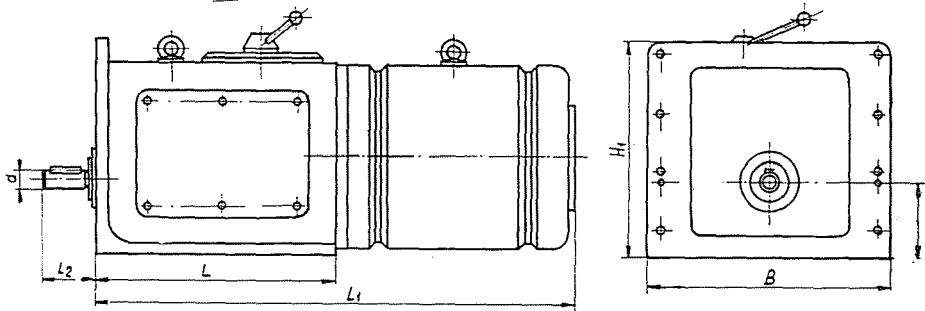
Type FE 63 Drilling Unit with multi-spindle attachment
